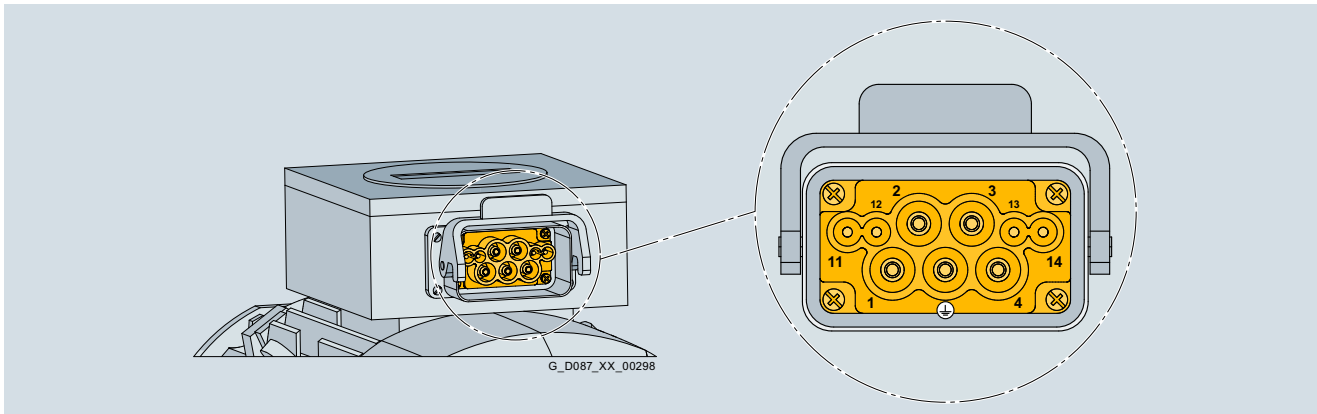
/18 HAN K4/4 motor plug with pin assignments
